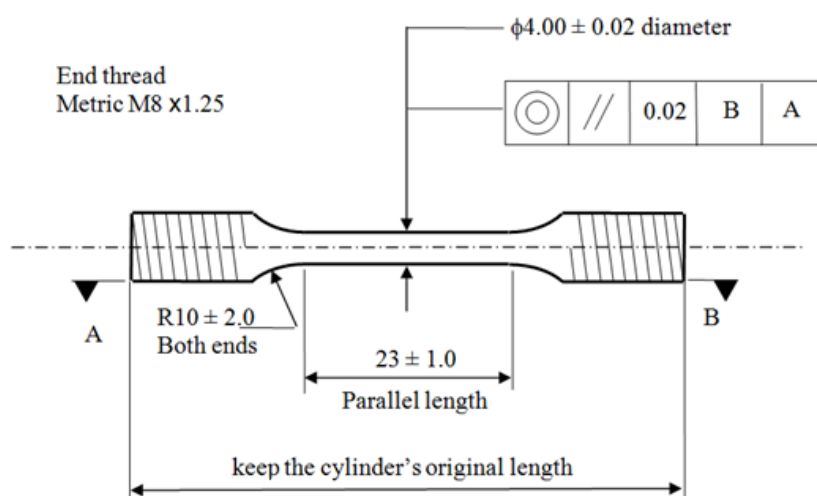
Geometry and dimension of an ASTM M8 tensile test specimen. (ASTM, 2016)
